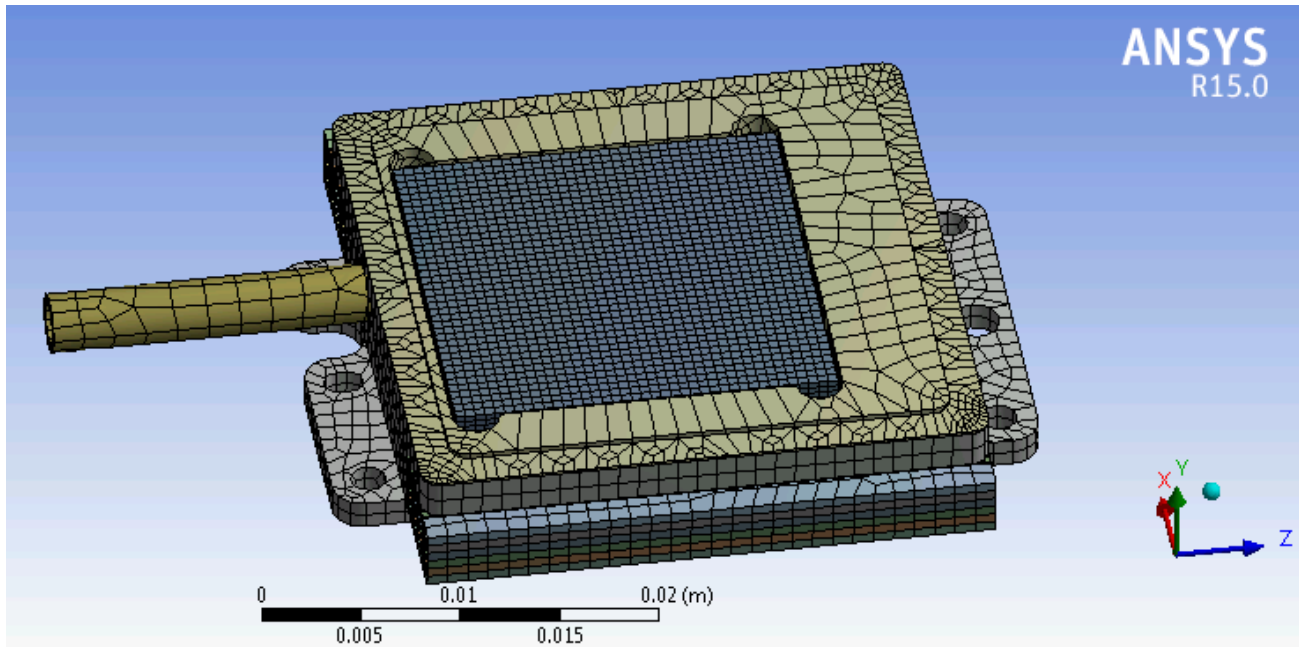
Finite element model used to optimize the package geometry, soldering material and adhesive
